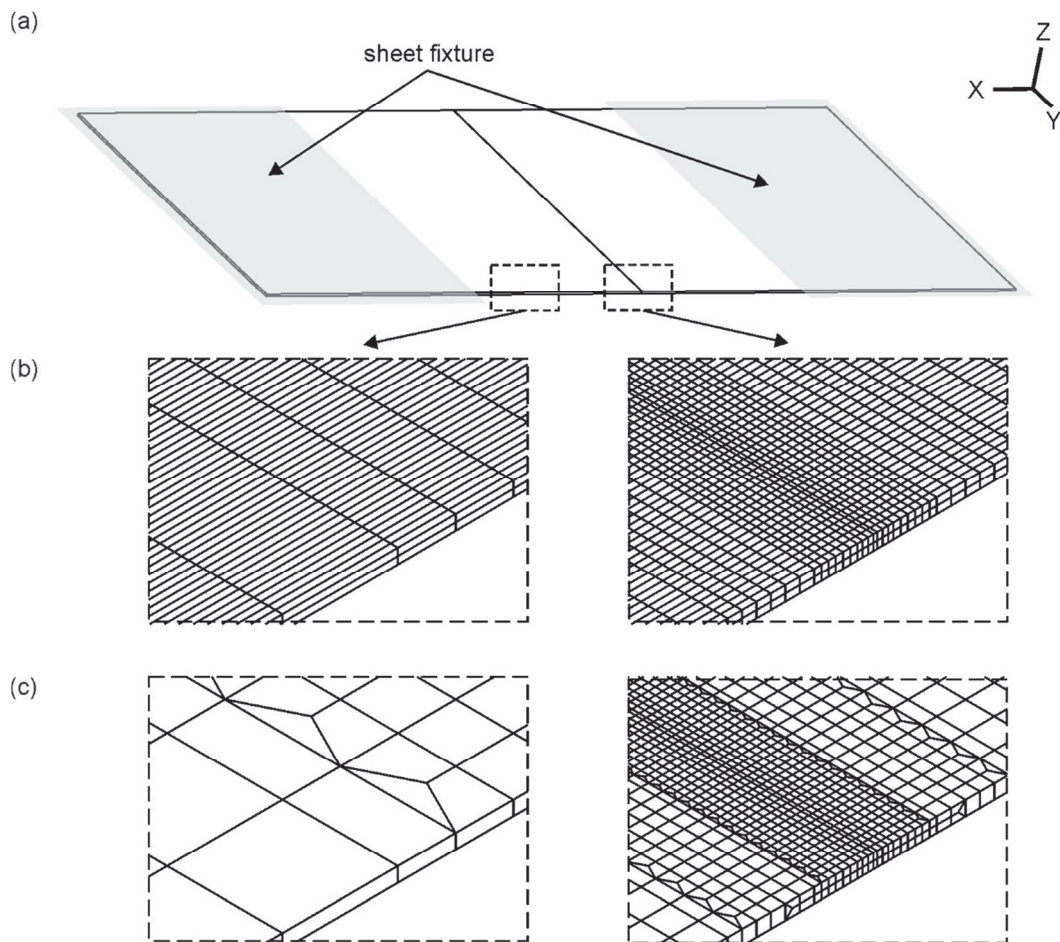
Welded sheets: geometry (gray planes denote fixture holding sheets during welding) (a), mesh with no reduction along Y and Z axes (b), mesh with reduction along Y and Z axes (c).
